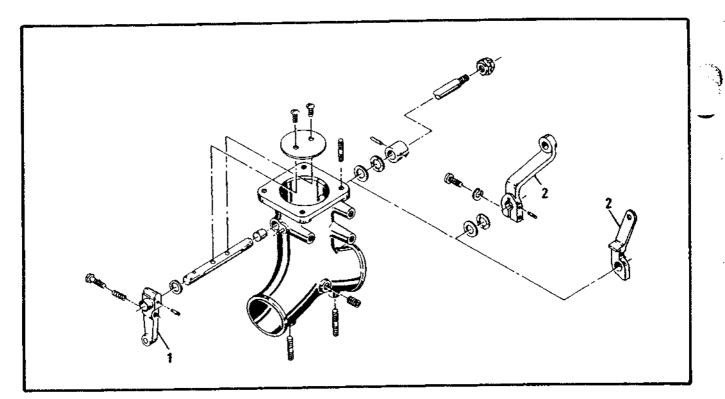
THROTTLE LEVERS (OLD STYLE)
